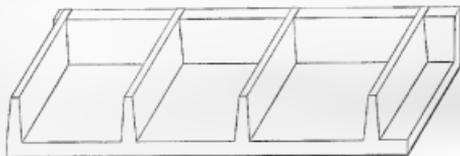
Linotype; large-work recessed slug. Scale: full size.
